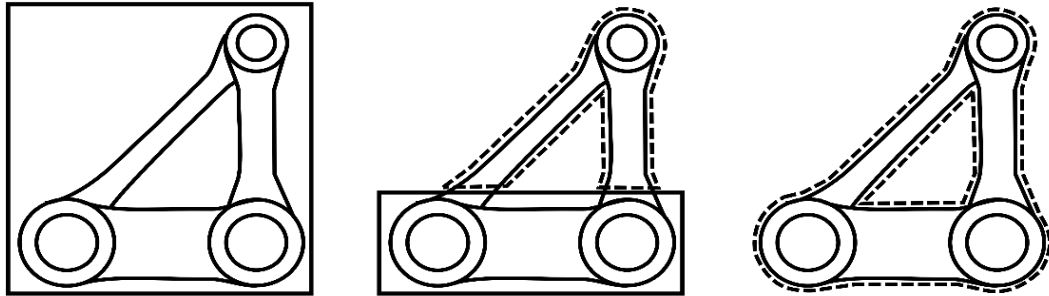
Sketch of (a) subtractive manufactured part, (b) hybrid manufactured part and (c) additive manufactured part
